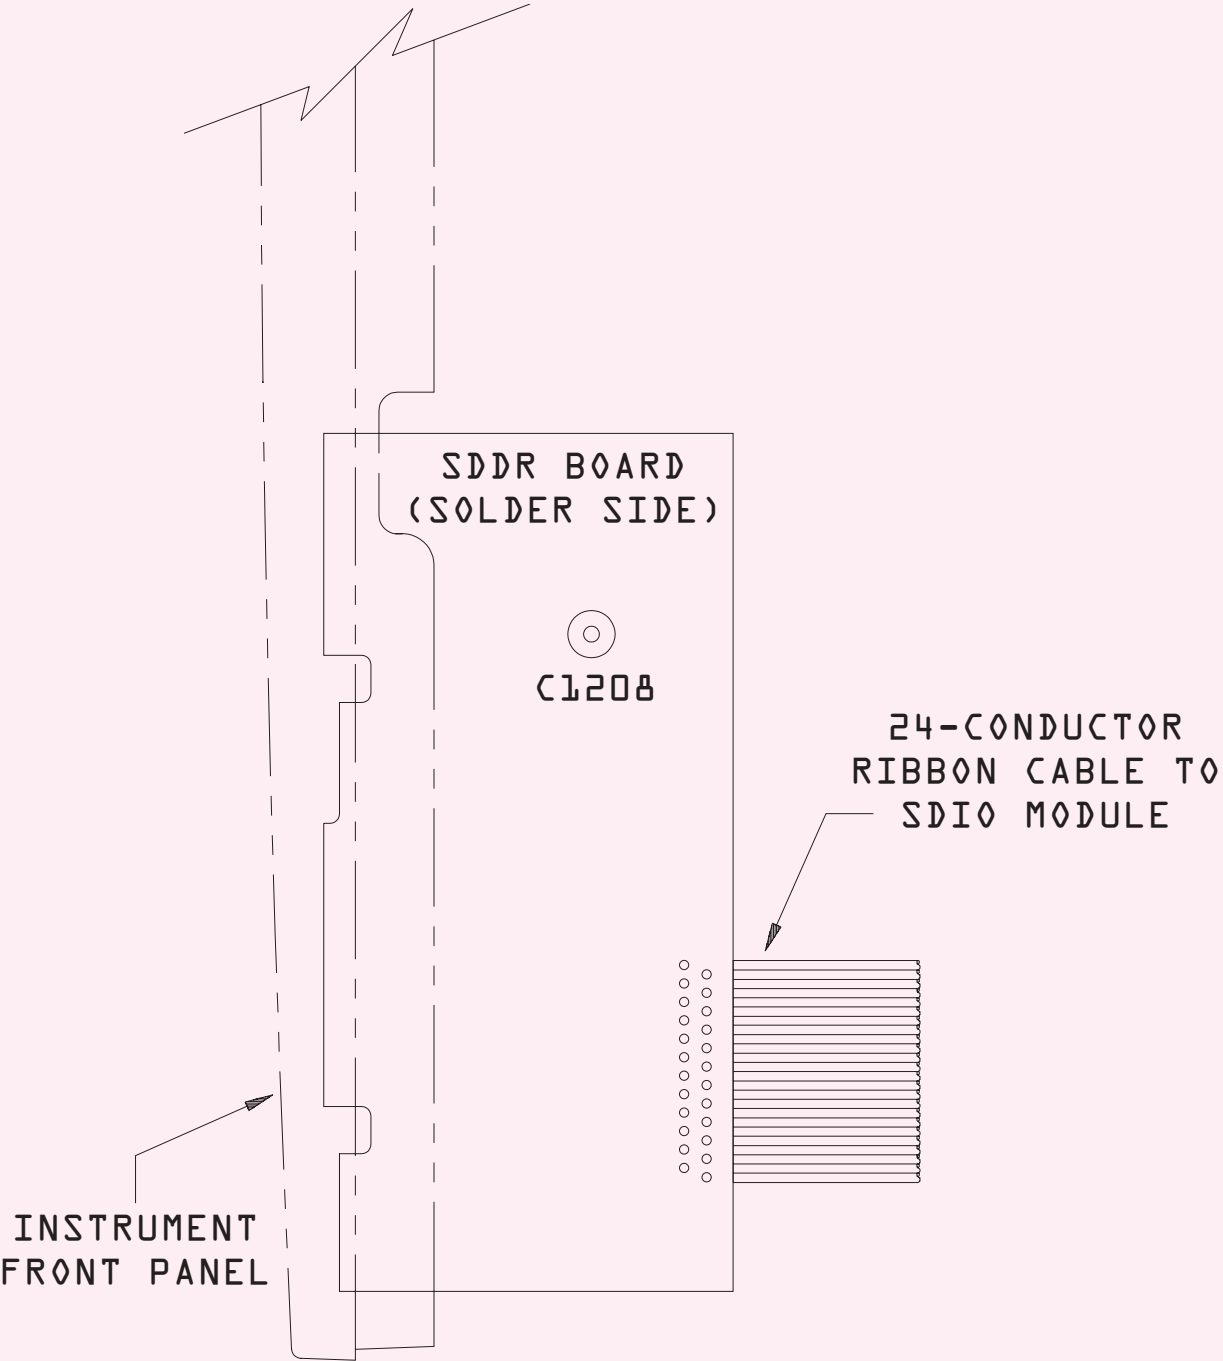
System Two DDF module adjustment location (on solder side of board).
